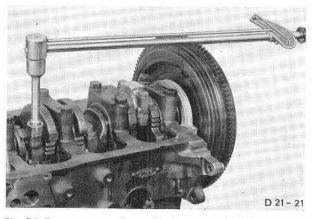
Torque connecting rod bolts as specified in Technical Data.
